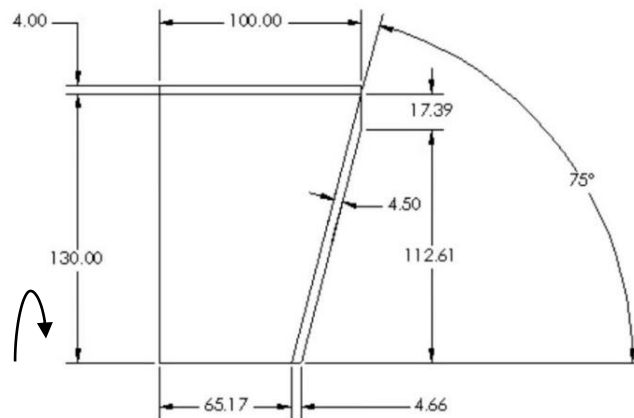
2D Drawing of TNT Shaped Charge as Beginning Design (Dimensions are in mm).
